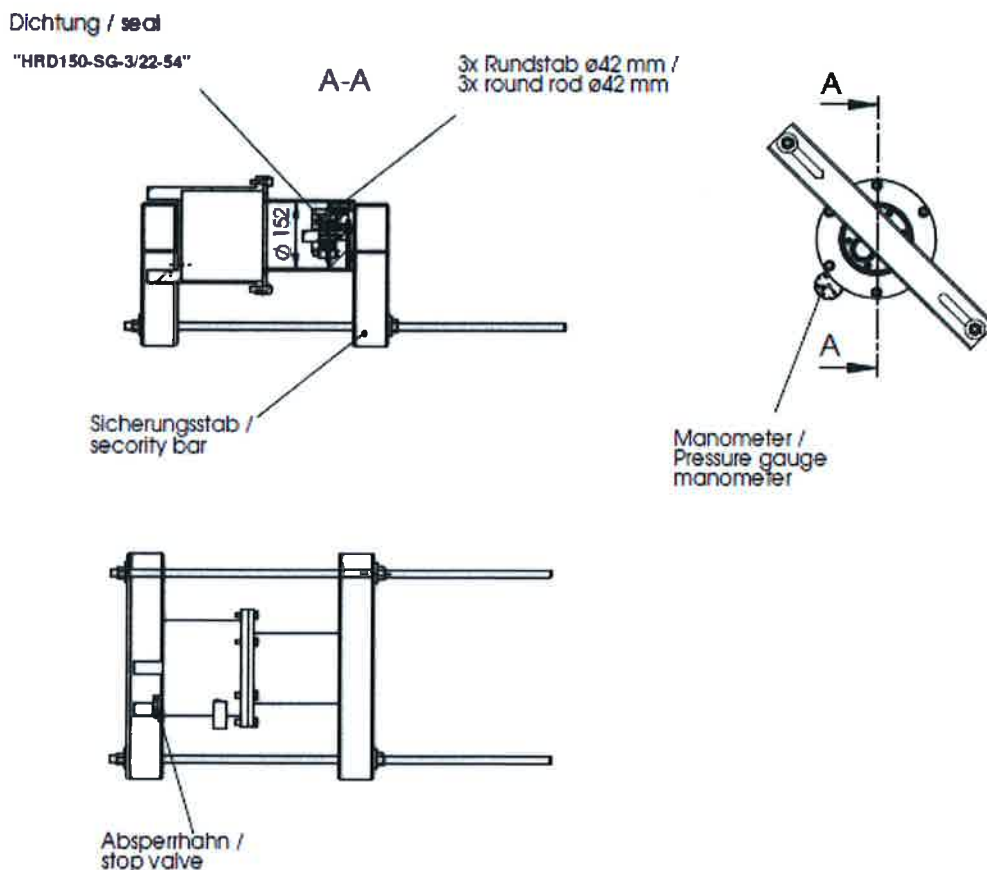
View and cross-section of the test setup with HRD150-SG-3/22-54 - manufacturer's drawing.
